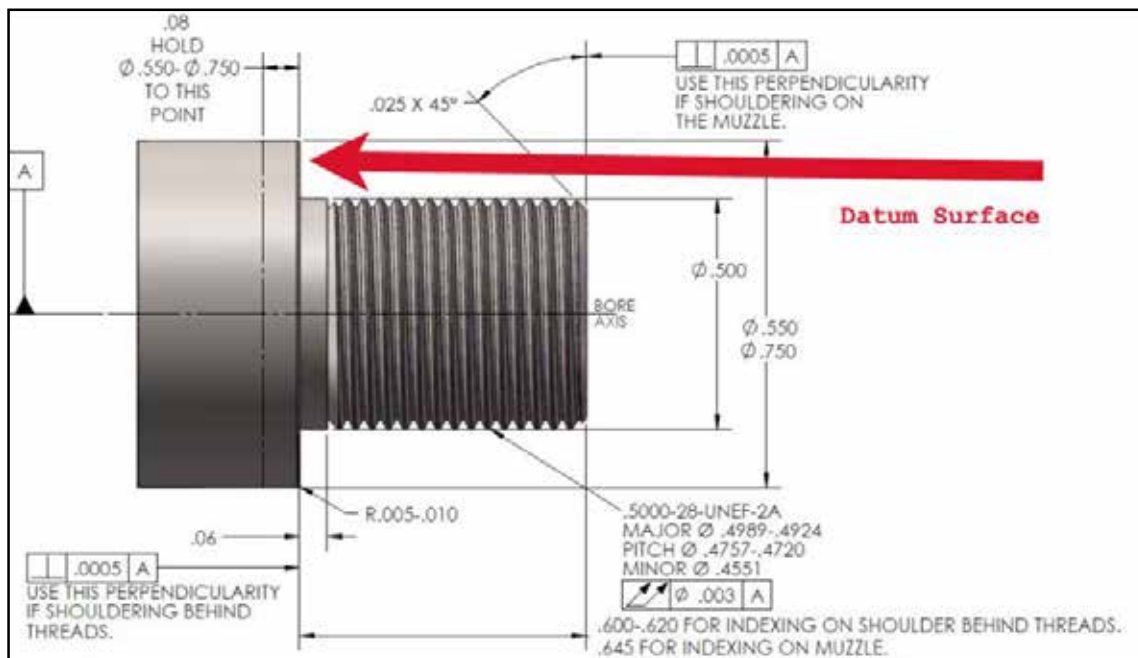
Sample  $\frac{1}{2} \times 28$  thread drawing.
